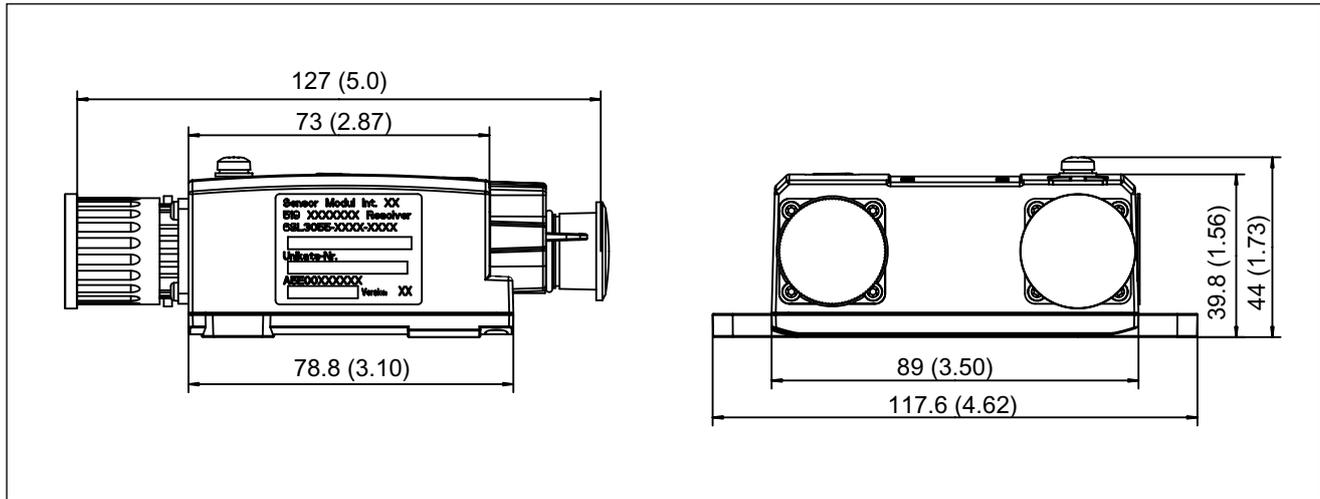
Dimension drawing SME125, Order number 6SL3055-0AA00-5KA0
